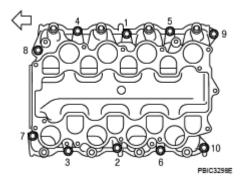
Identifying Intake Manifold (Lower) Mounting Bolts Loosening Sequence
